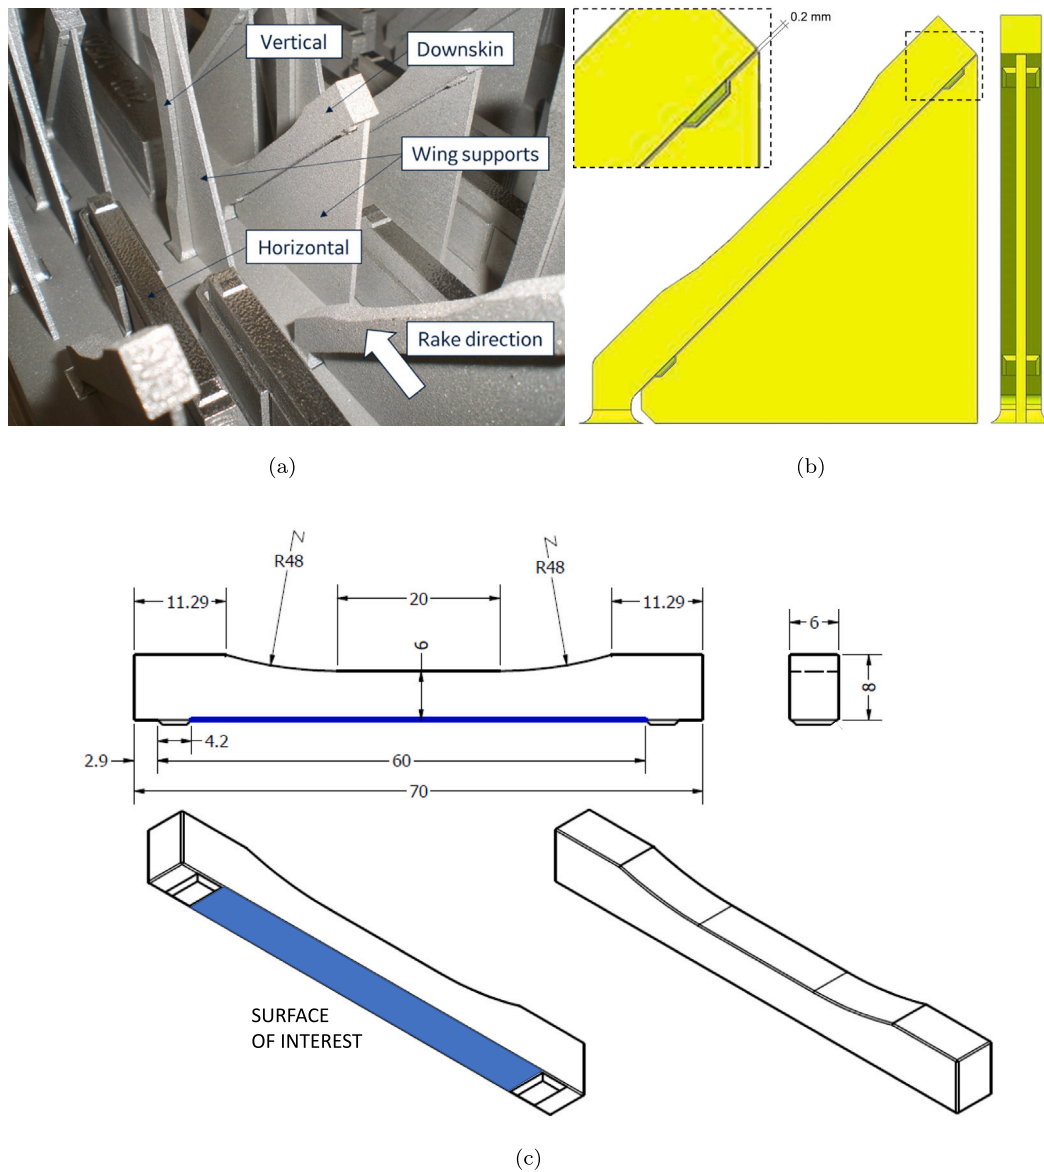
Detail of 4PB specimens: (a) L-PBF built disposition and configuration; (b) Detail of wing support on downskin specimen; (c) Technical drawing highlighting the surface subjected to maximum stress (dimensions are in mm).
